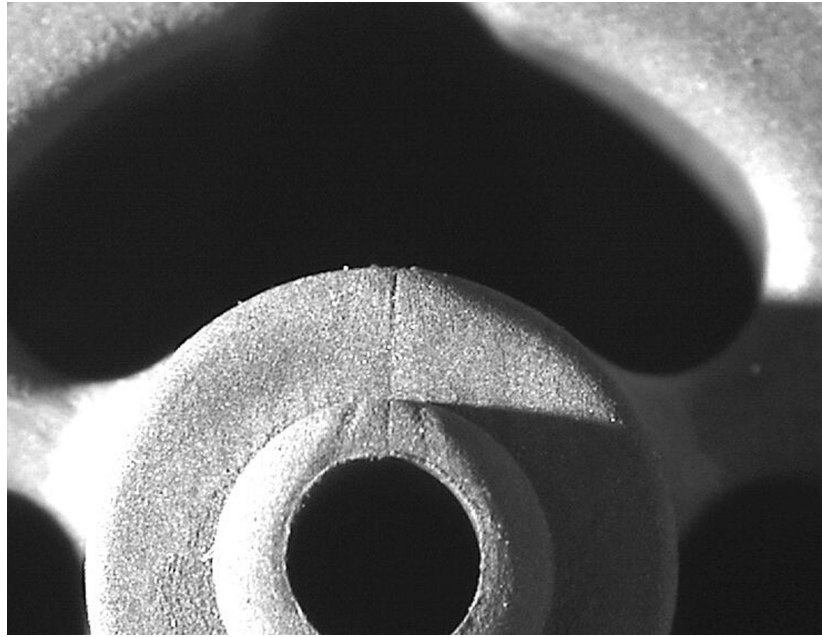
Weld line and superficial sink mark on a hub of an injection moulded MIM component. Circumferential tensile stresses will load the weld line with fracture opening mode 1 during the interference fitting
